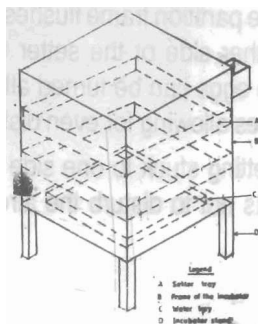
ISOMETRIC VIEW OF THE INCUBATOR.
